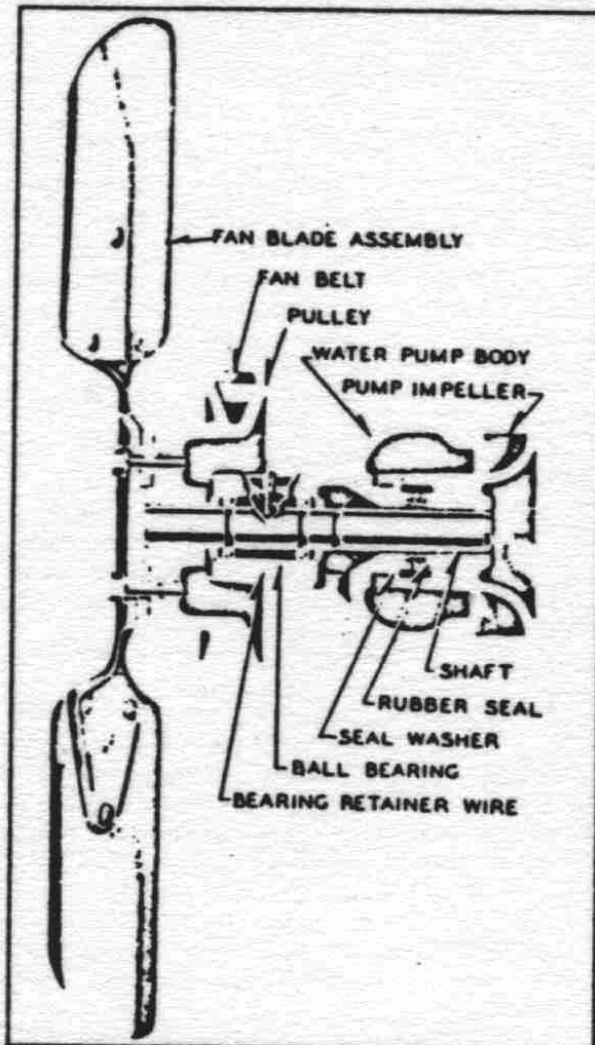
FAN AND WATER PUMP ASSEMBLY
